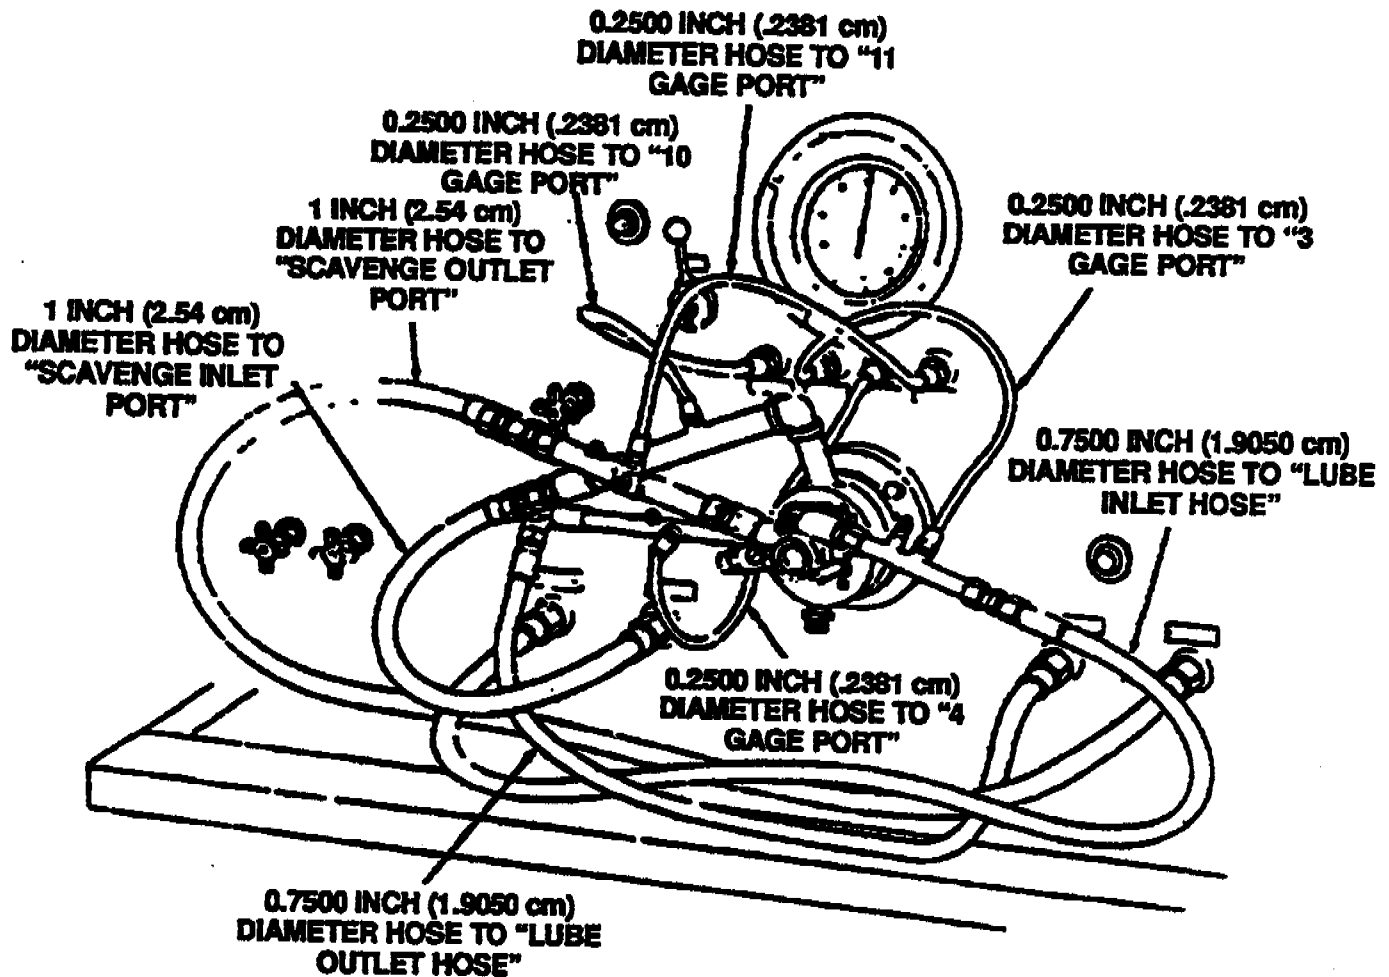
Power-Driven Rotary (Oil) Pump Installed on Test Stand.
